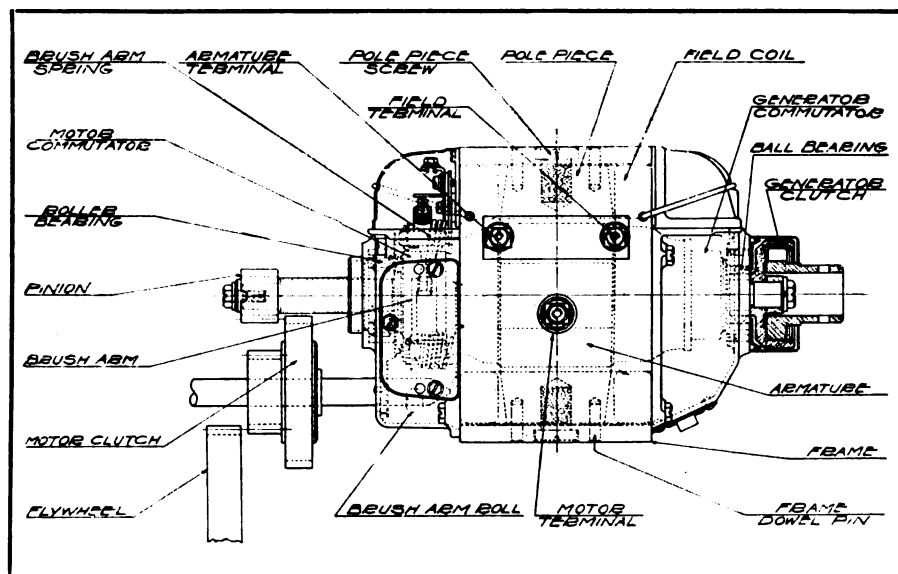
Armature Drives Flywheel Through Pair of Sliding Gears.
